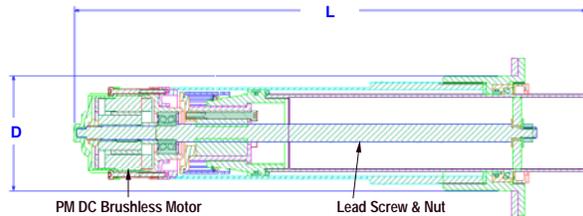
Assembly drawing of a self-locking telescoping mechanism with a motor and lead screw, and an EA element.
